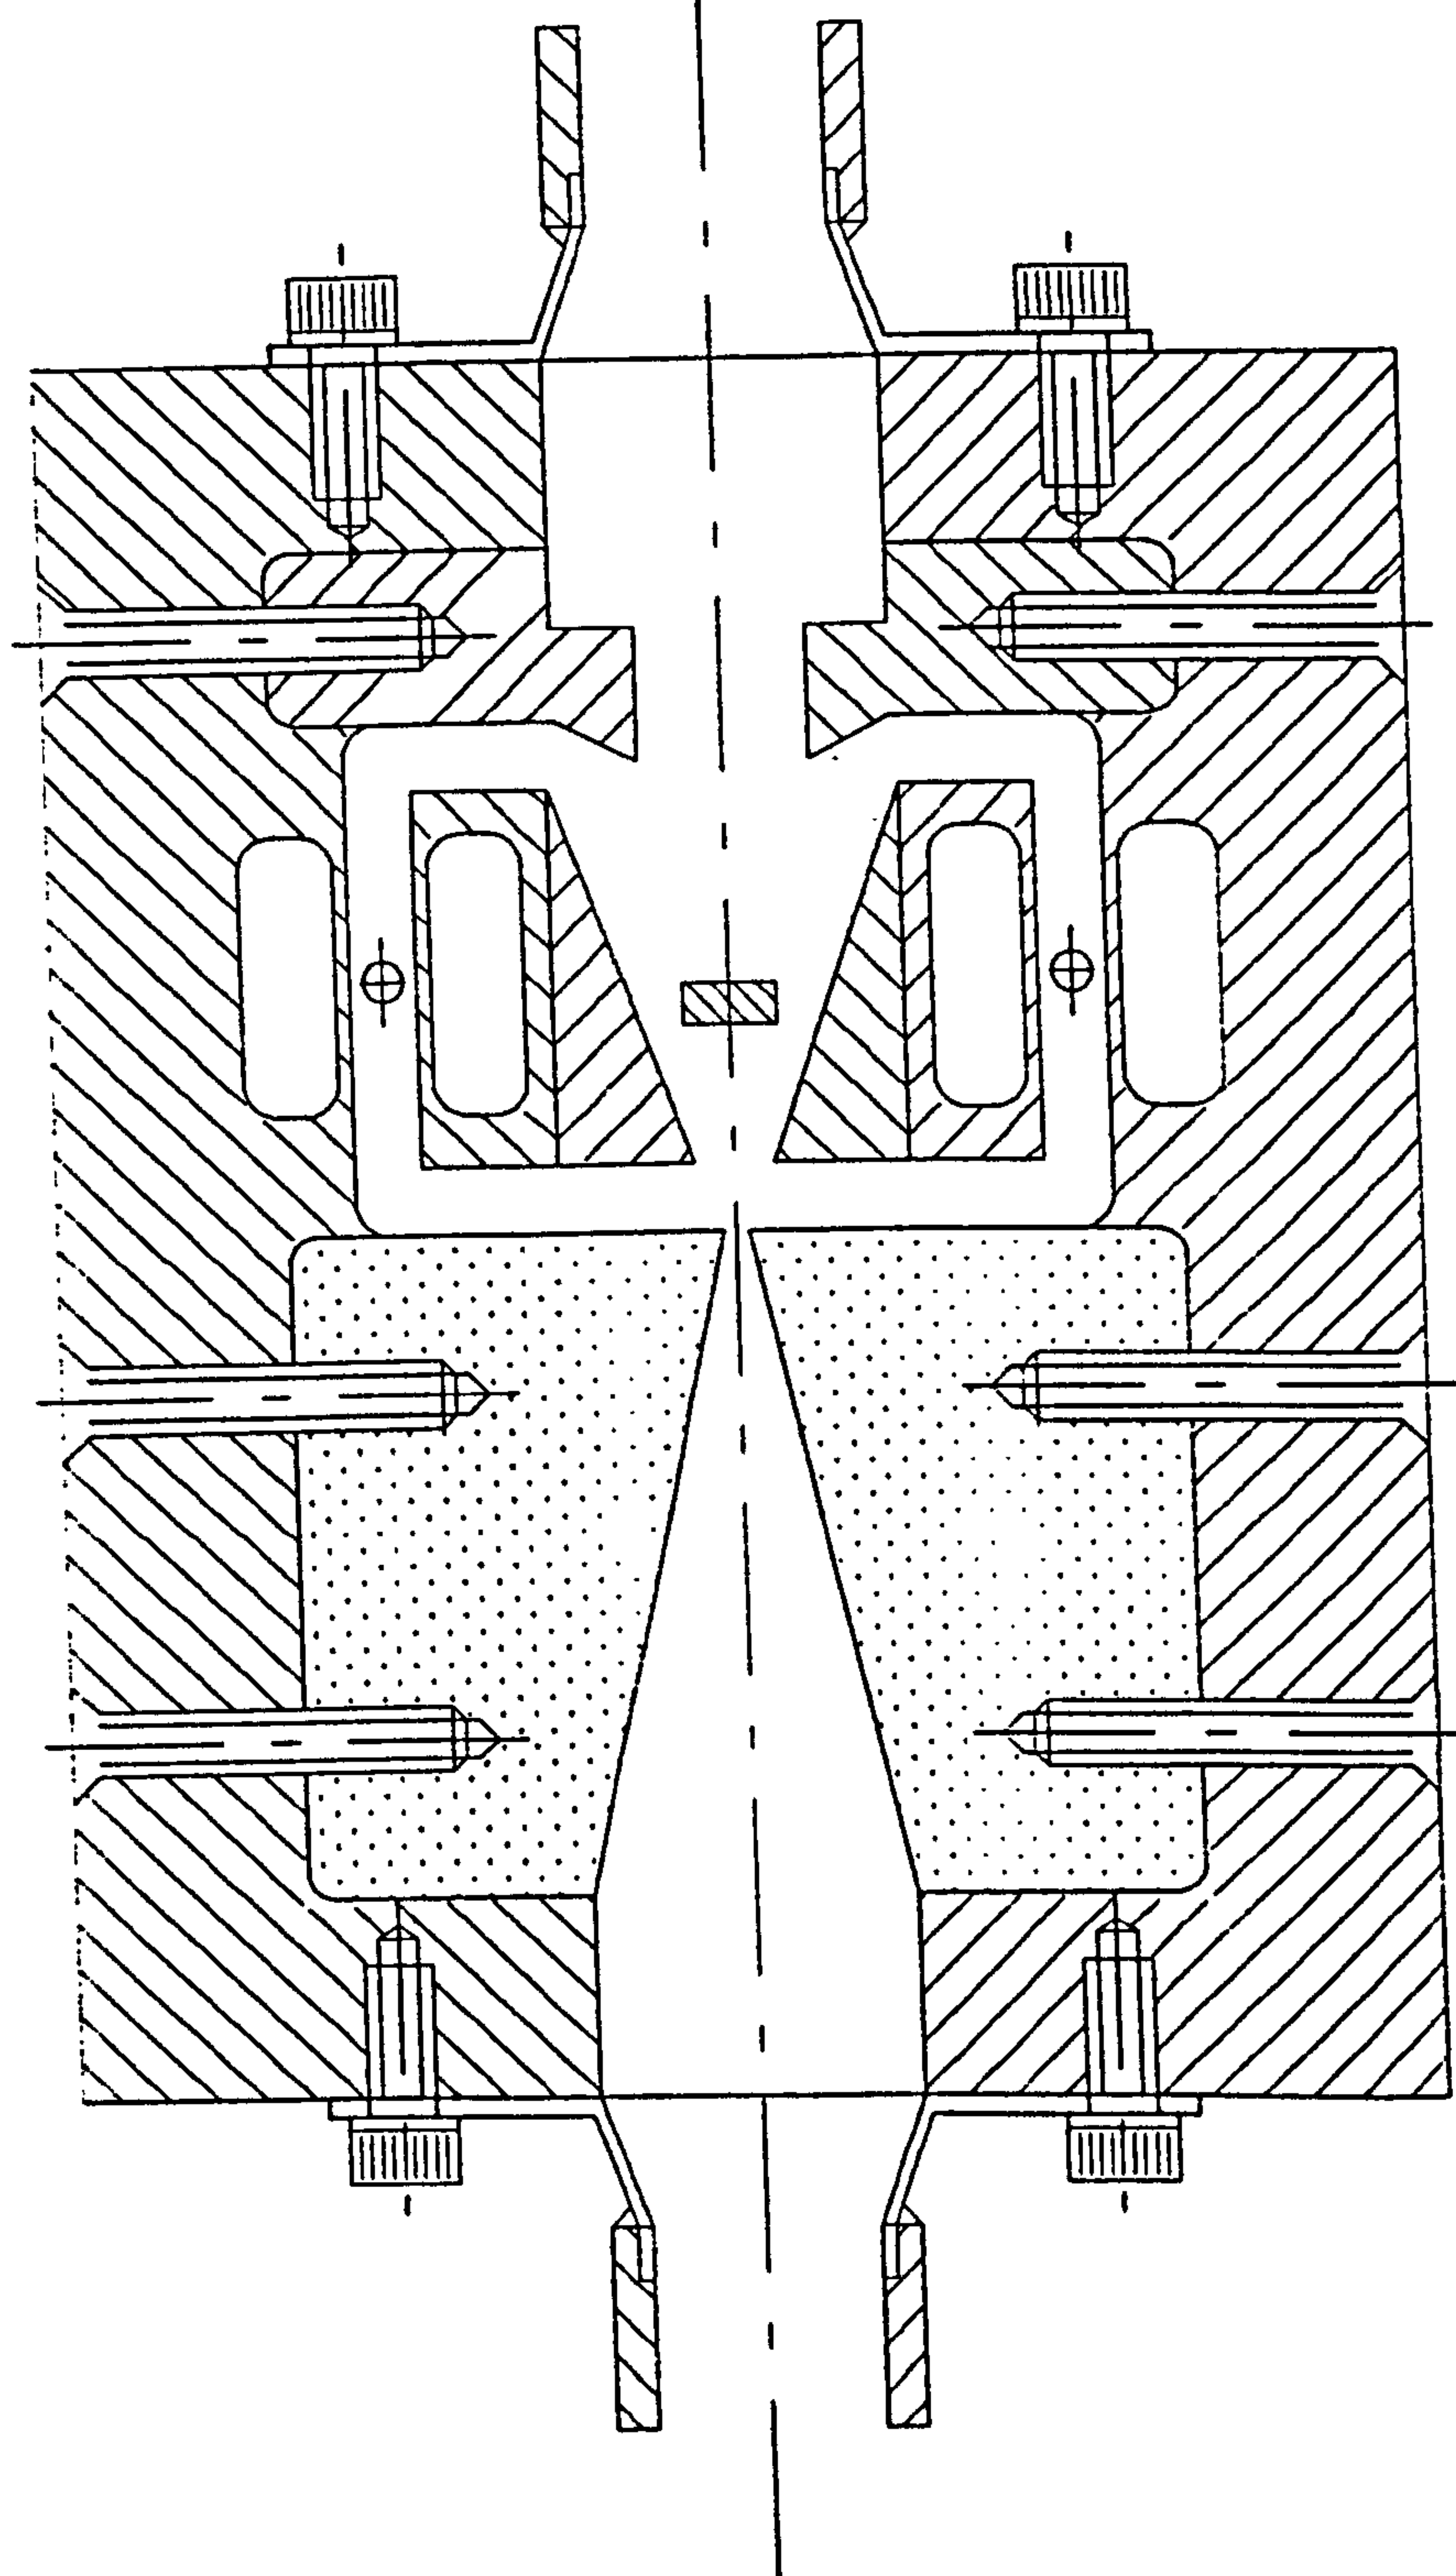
Geometry of Inlet Nozzle With Parallel Section Removed.
